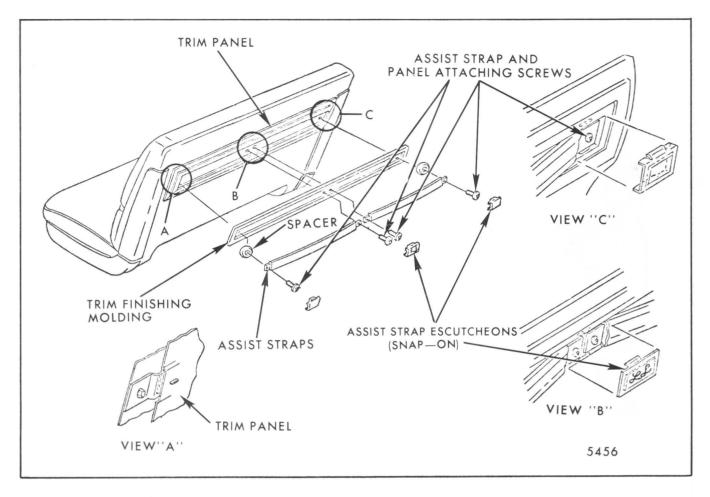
Front Seat Back Assist Straps and Panel Assembly - Oldsmobile Luxury Sedan
